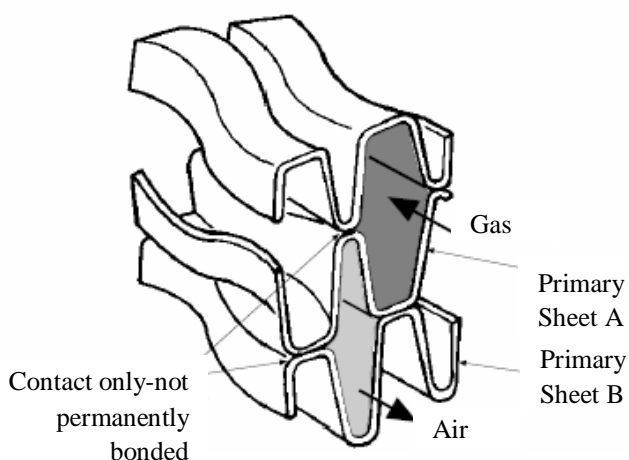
Primary surface sheets of compact heat exchanger surfaces [3].
